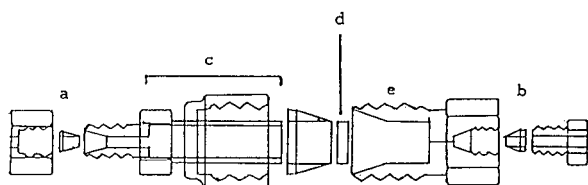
Exploded view of supercritical fluid carbon dioxide extraction vessel: (a) inlet, stainless-steel 1/16 in. fractional tube and ferrules; (b) outlet, stainless-steel 1/16 in. male nut and ferrules; (c) Swagelock stainless-steel 1/16 in. fractional tube to 1/4 in. fractional tube stub; (d) 1/4 in. diameter, 0.5 μm pore size stainless-steel frit; and (e) Swagelock stainless-steel 1/4 in. to 1/16 in. low dead volume reducing union.
